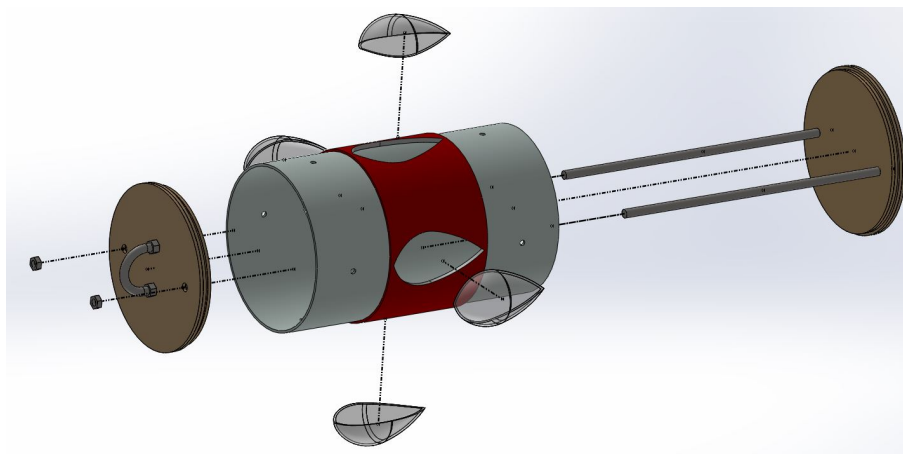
Exploded view of the payload bay showing four housings that will be bolted to the airframe. The bulkheads are joined by a threaded rod that runs the entire length of the bay.
